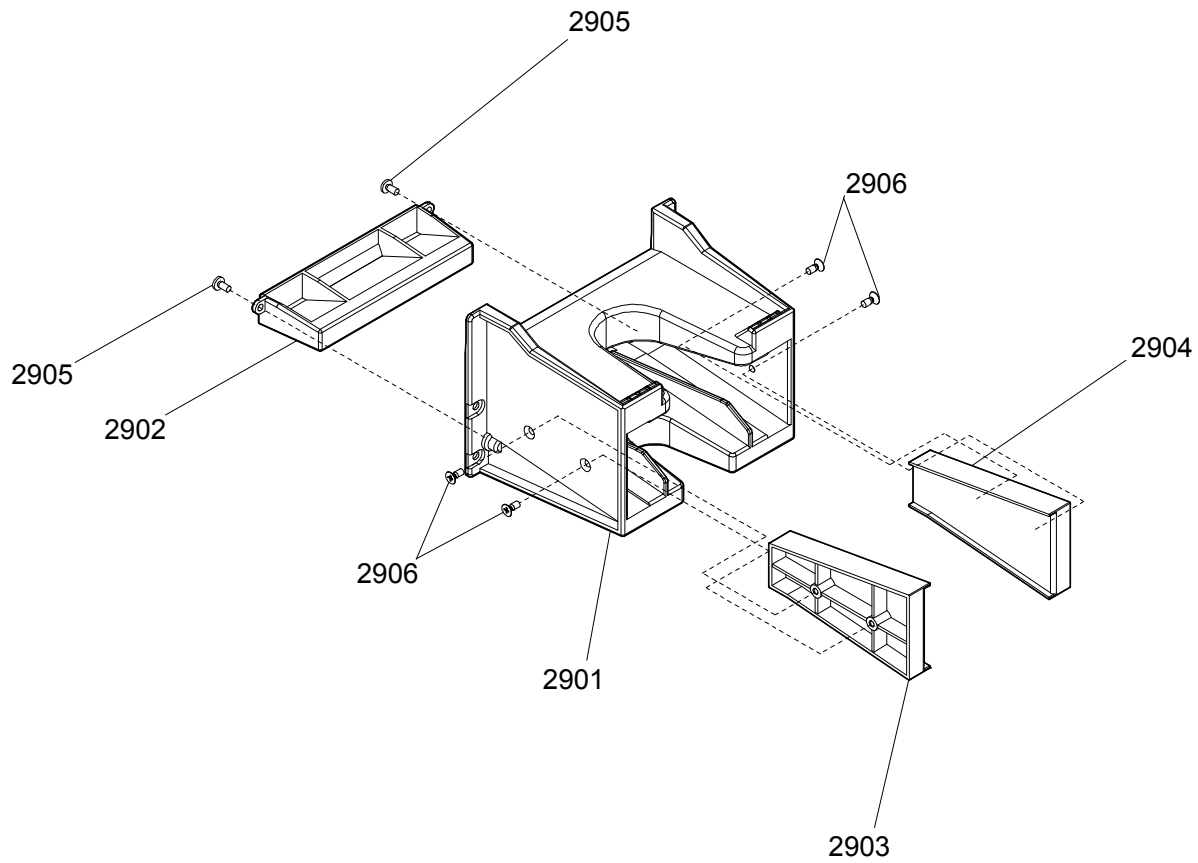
TBV and TBV-SH Frame Unit Exploded View
